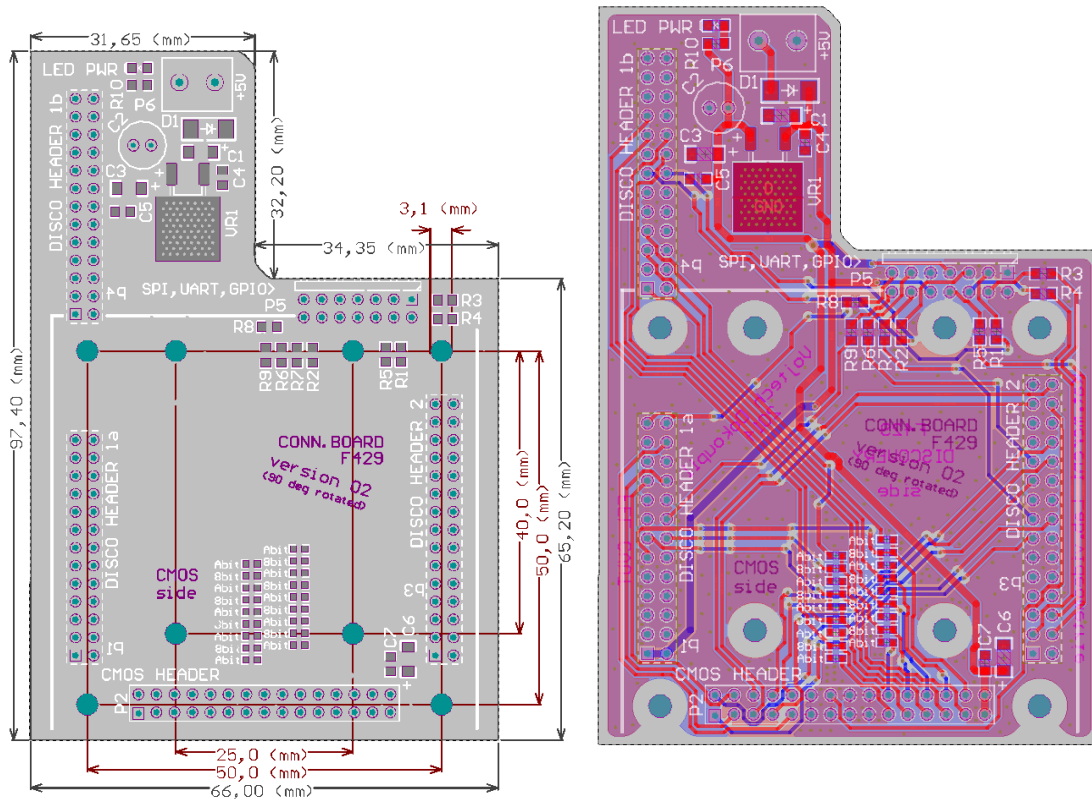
Mechanical (dimensions included) and routing drawing of CONN.BOARD F429 version1
